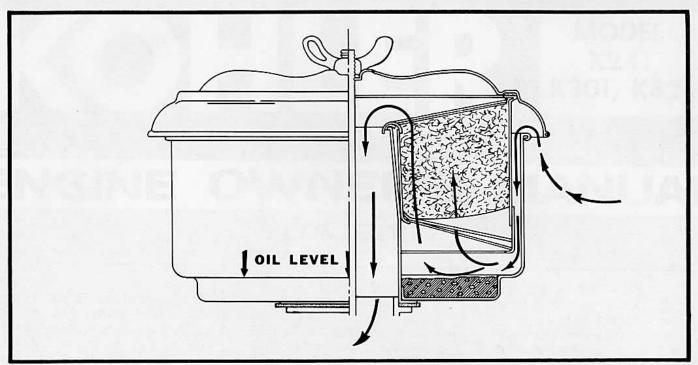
CUTAWAY VIEW SHOWING AIR FLOW THRU A TYPICAL OIL BATH AIR CLEANER
